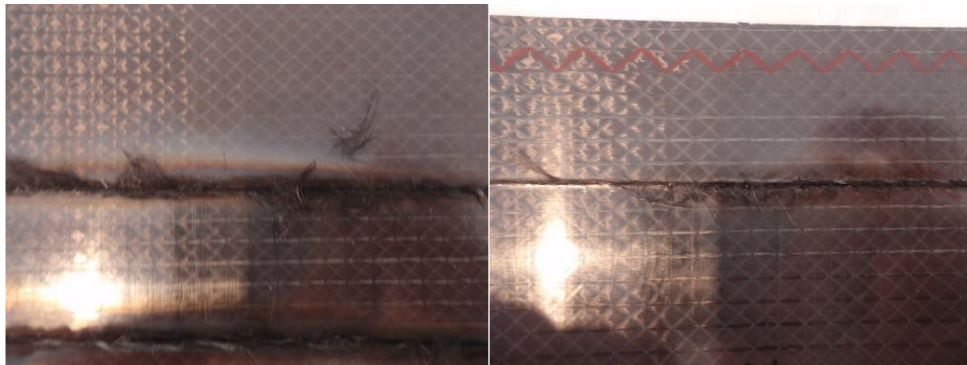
Images of top side laser cut surfaces of tests 55 (left) and 55 (right).
